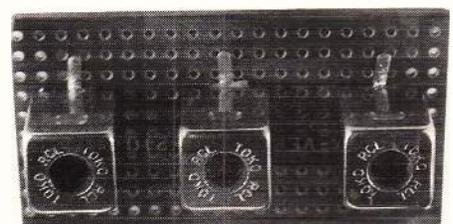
The Veroboard sub-assembly showing the Toko coils.
